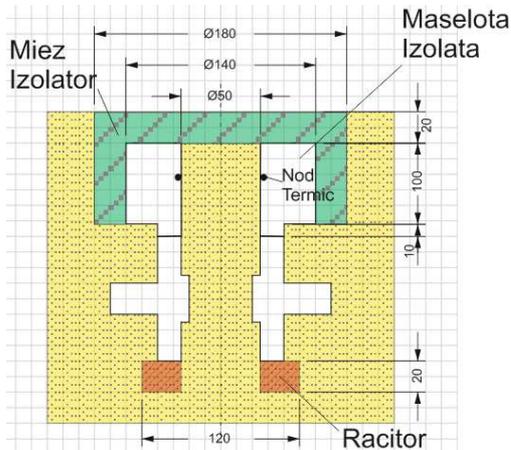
Variant of casting with short annular feeder, with thermal insulated coating and cooler (case 6)
